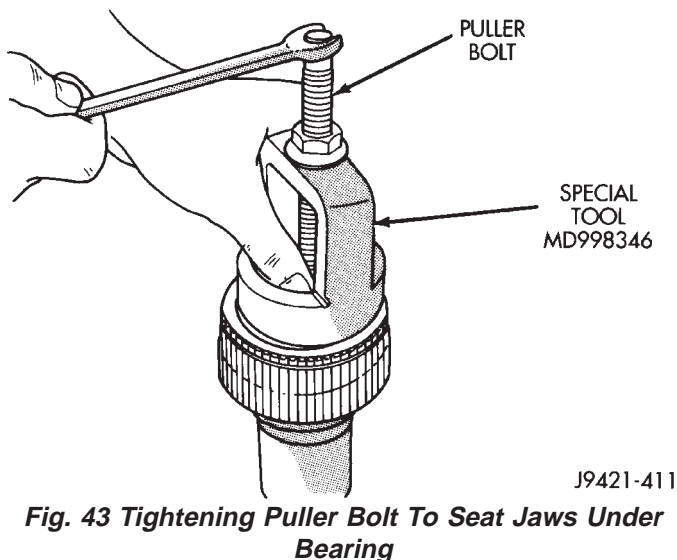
Tightening Puller Bolt To Seat Jaws Under Bearing
